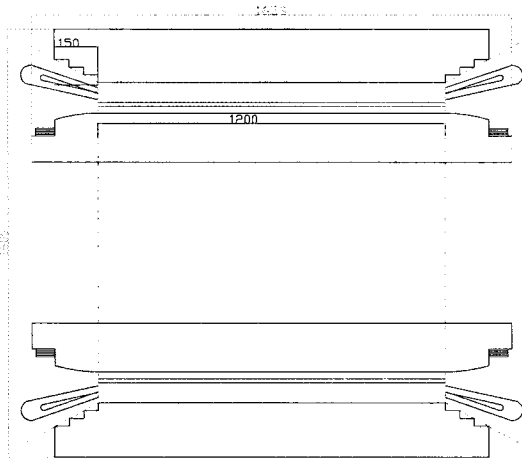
Longitudinal cross-sectional view of a 5 MW iron-cored type design HTS motor from Fig. 13 (mm dimension).
